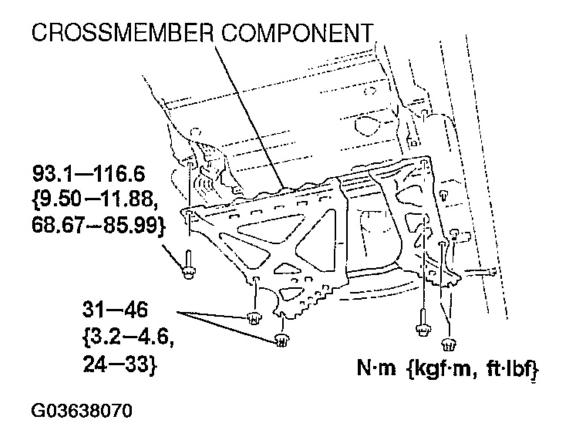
Installing Crossmember Component & Torque Specifications Courtesy of MAZDA MOTORS CORP.
